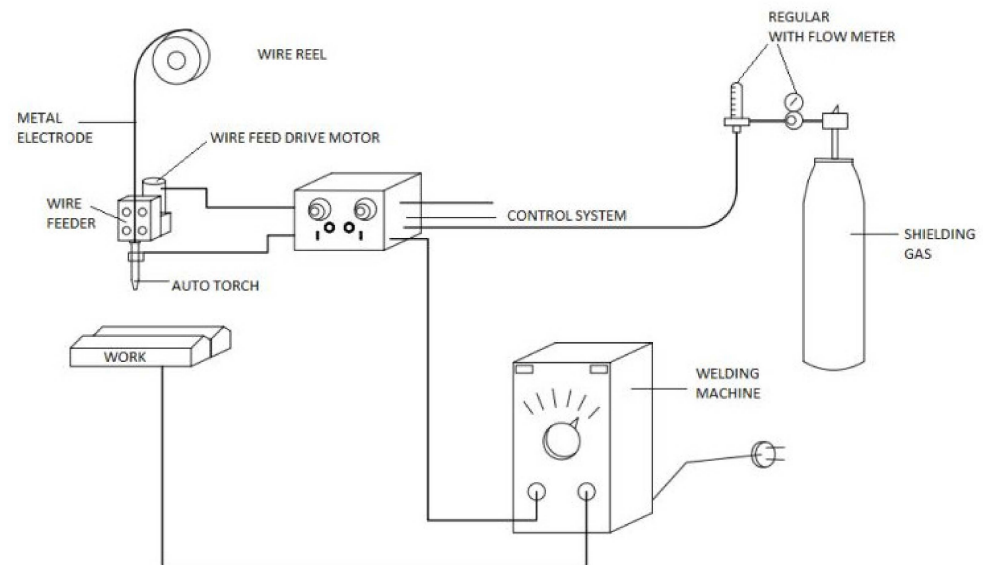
Layout of Gas Metal Arc Welding Machine.
